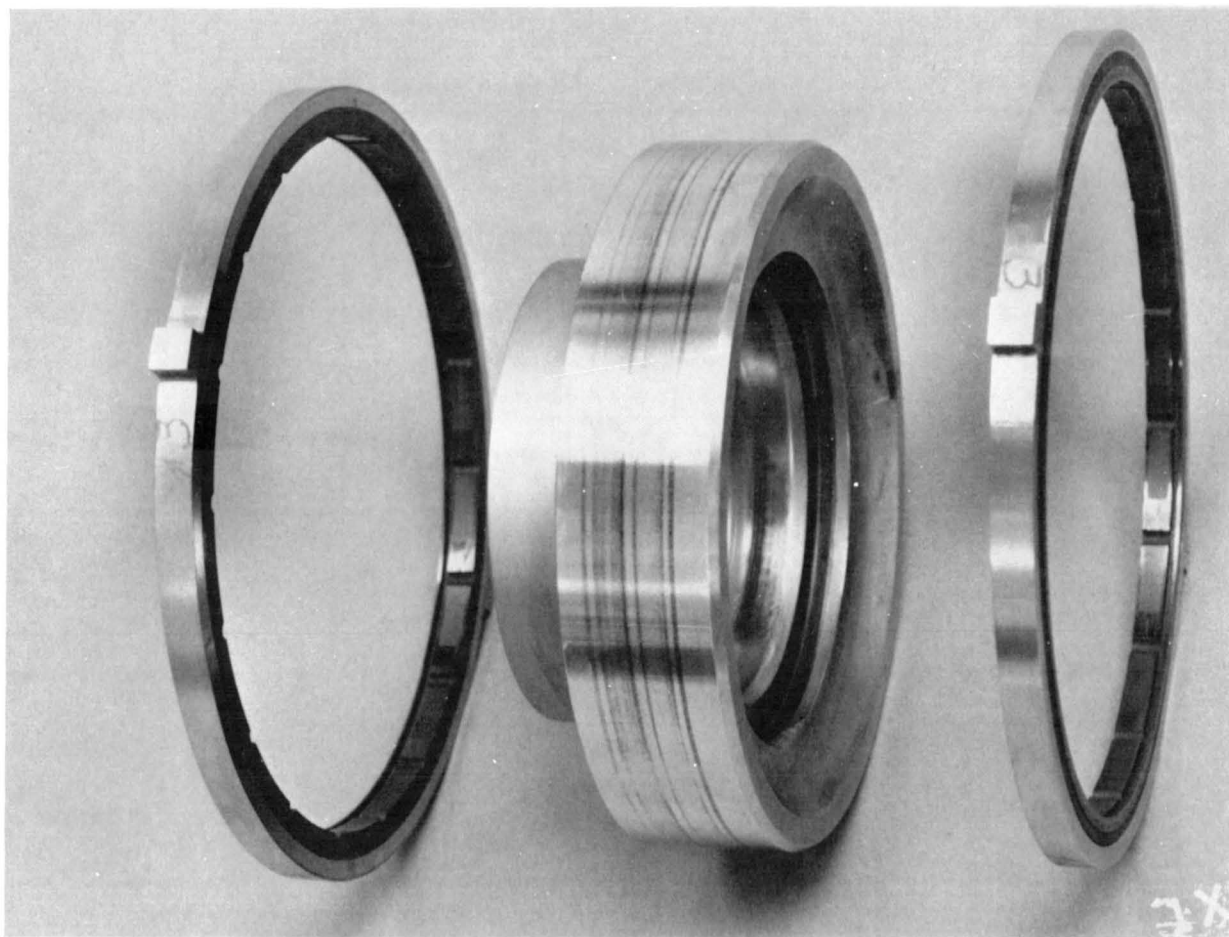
Helium Seal Assembly 99RS006215, S/N 03, Posttest 295, Build 20
